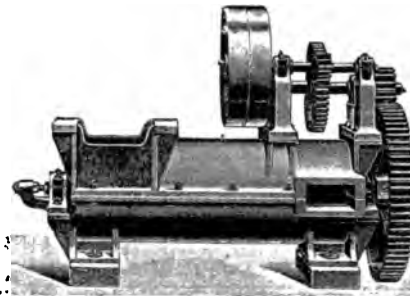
Horizontal Pug-mill with attached Gear (Jäger).
